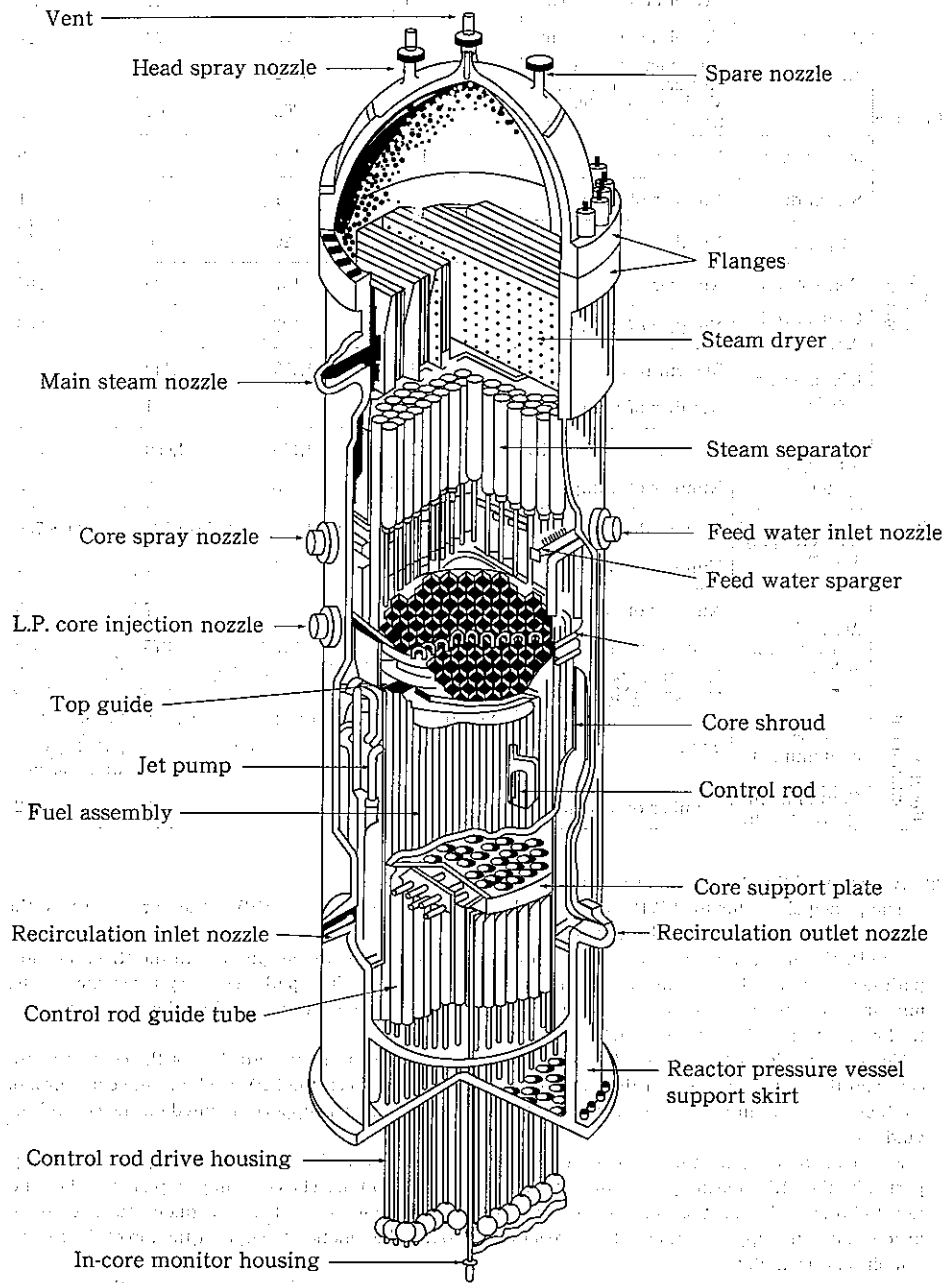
Assembly of RPV and Reactor Core Internals for BWR
